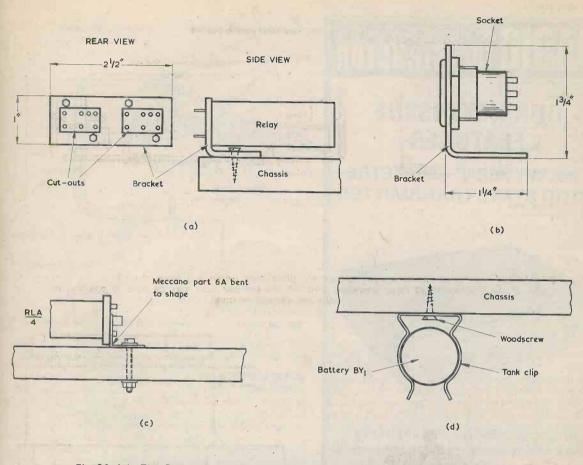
(a). The Perspex bracket on which relays RLB and RLC are mounted (b). The power socket is also mounted on a Perspex bracket (c). A Meccano part is used for securing relay RLA (d). The Deac battery is secured to the chassis underside by a Ripmax Tank Clip
